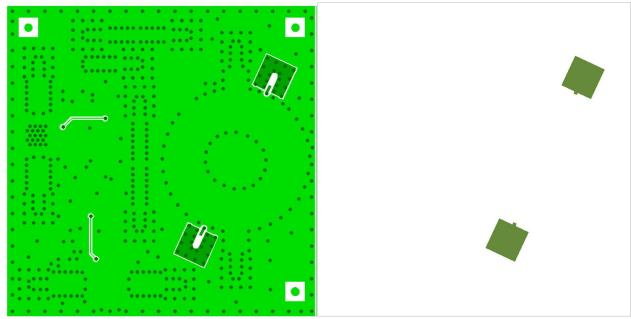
LH Layer 5 board 1; RH Bottom solder mask board 1
